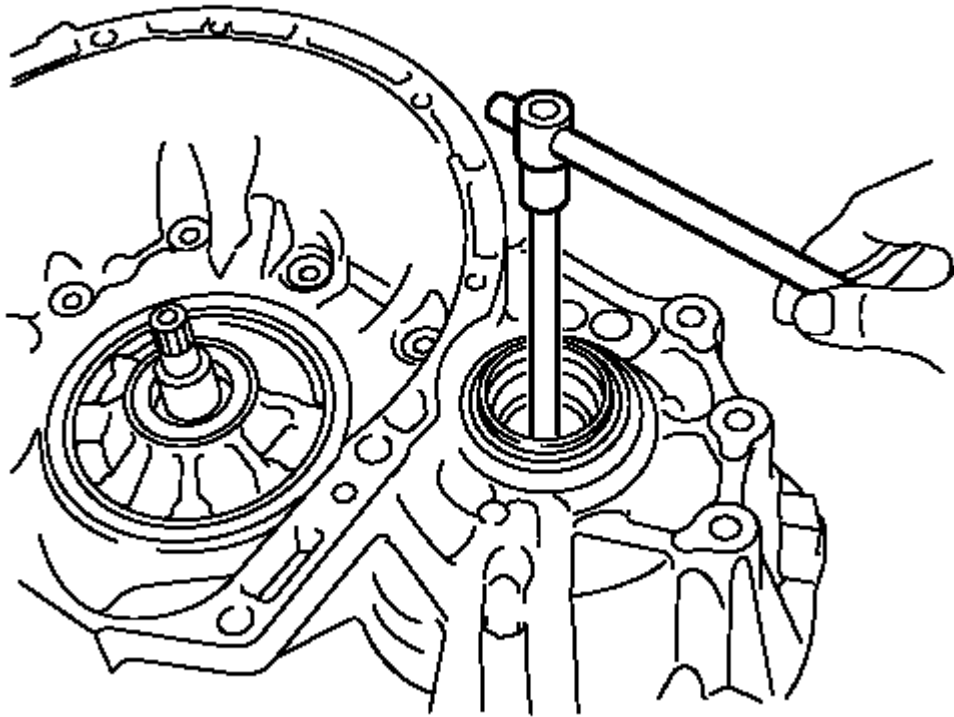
Turning Differential Gear Assembly Right And Left Using DT-46461 Tool
